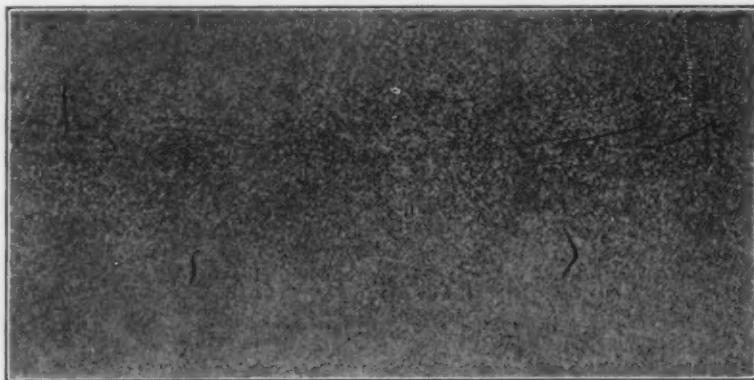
Tangential Longitudinal Section from a New Rolled Steel Wheel. Reduction one-half
